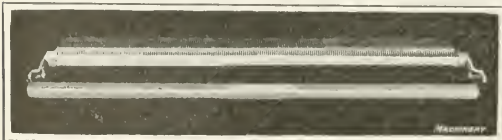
Tube Frame for Carpet Loom and a Length of Tube
